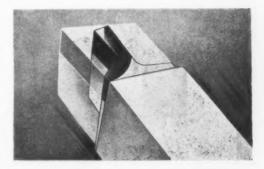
Bar Tool Modified to Form a Parting and Chamfering Tool
